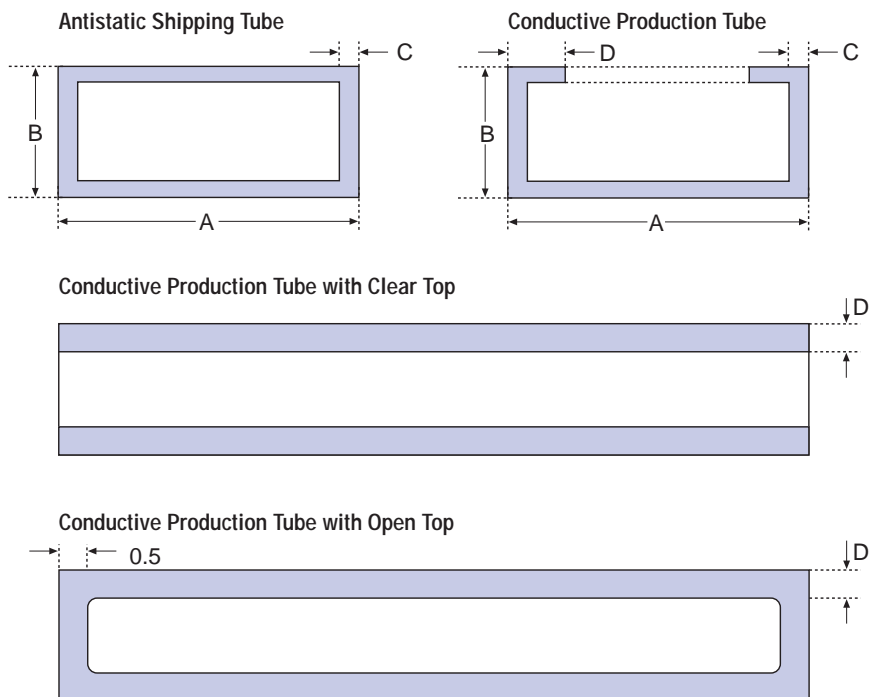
shows the tube dimensions required for each J-lead device. The tubes must match the dimensions of the device.
